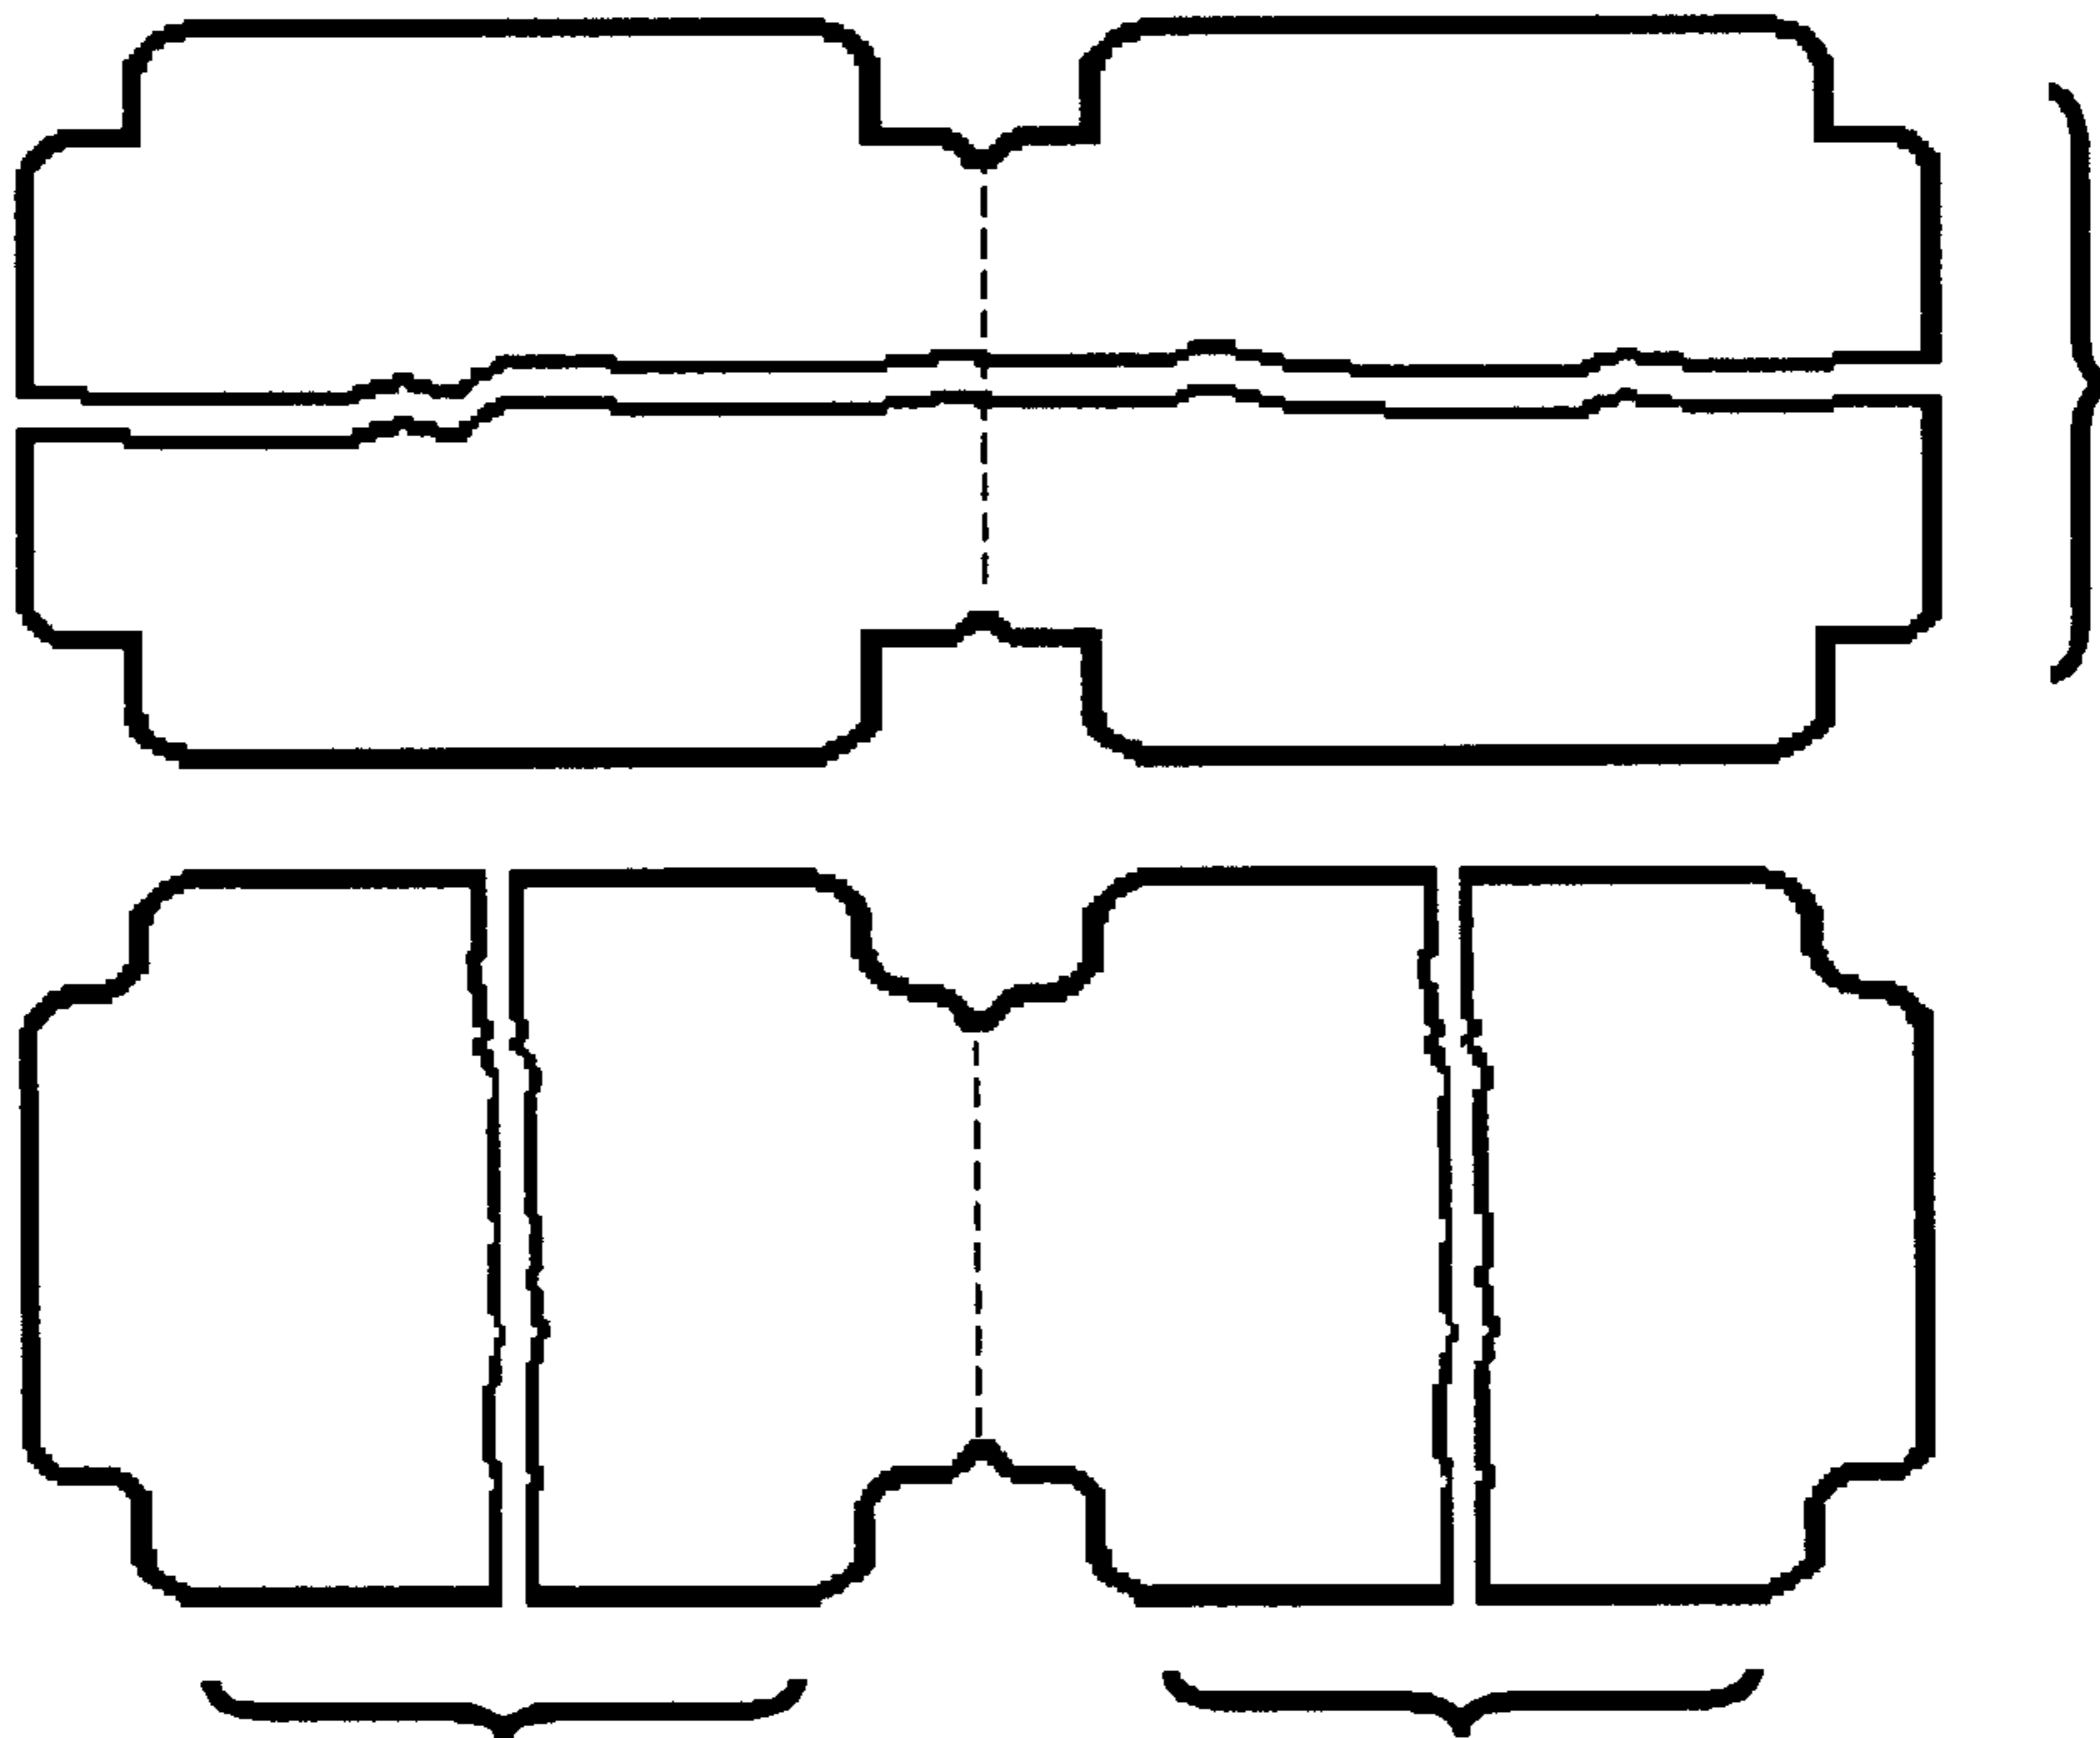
is a top plan view of a second embodiment of my new design which is shown broken away to indicate indeterminate width. The adhesive surfaced bottom view is identical thereto;
